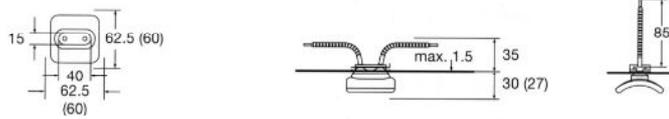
Mounting dimensions and radiator dimensions ( ) in mm
